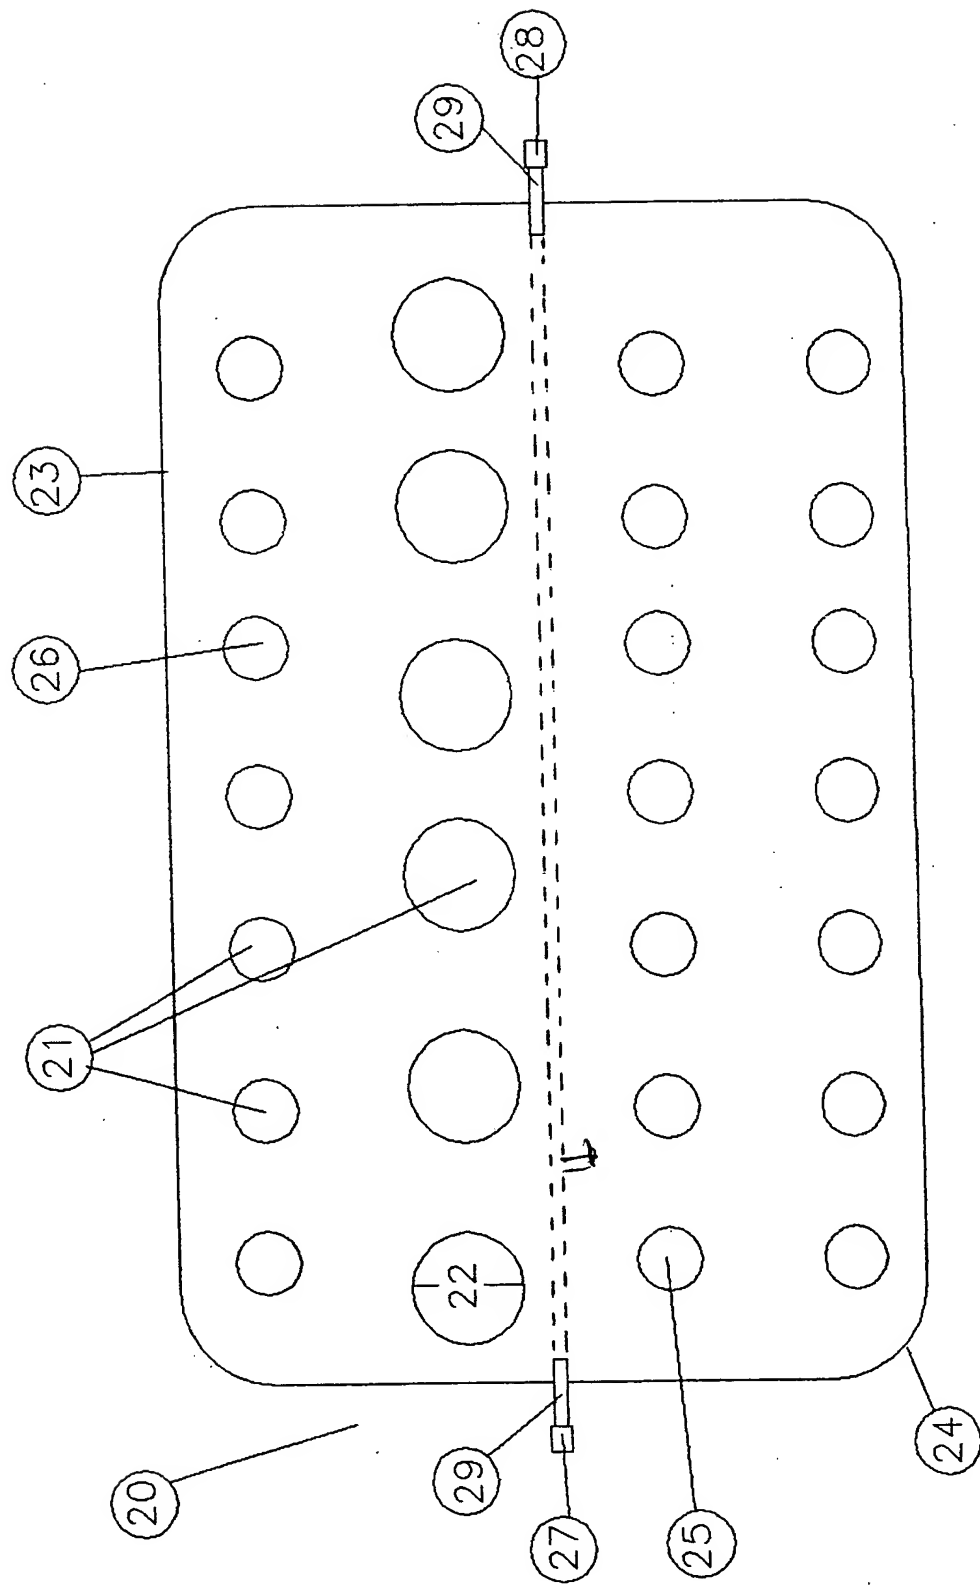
SCHEMATIC TOP VIEW OF ENGINEERED LANDSCAPE/FLOWER PANELS SHOWING POSSIBLE CONFIGURATION OF PRE-CUT PLANTING HOLES.
